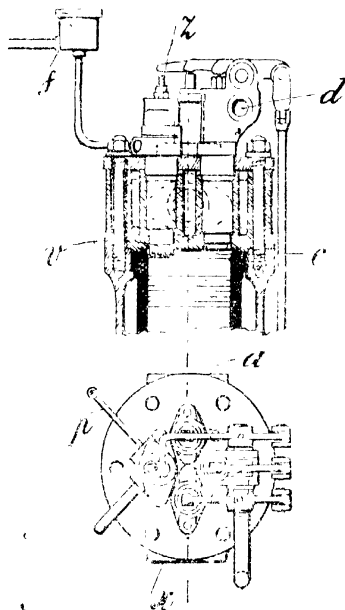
Sectional elevation and plan, showing general arrangement of the Brons Compression Vaporiser process for heavy oils
